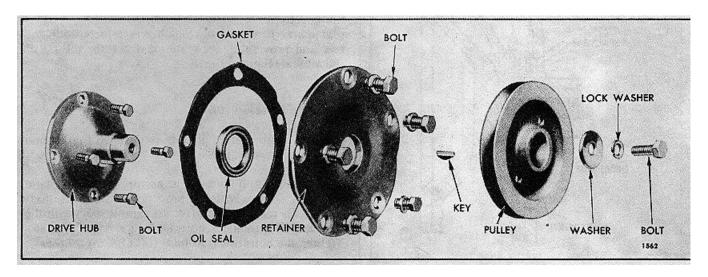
Components of Accessory Drive for Belt-Driven Accessory (Drive Hub Type)
